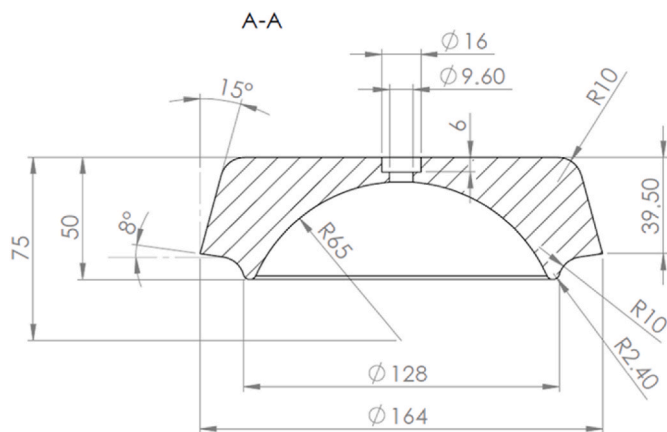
Technical drawing of the lid used for the new design of InduMelt trials with improved gas extraction.
